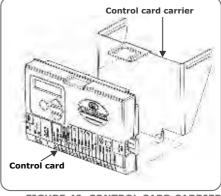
CONTROL CARD CARRIER ASSEMBLY
